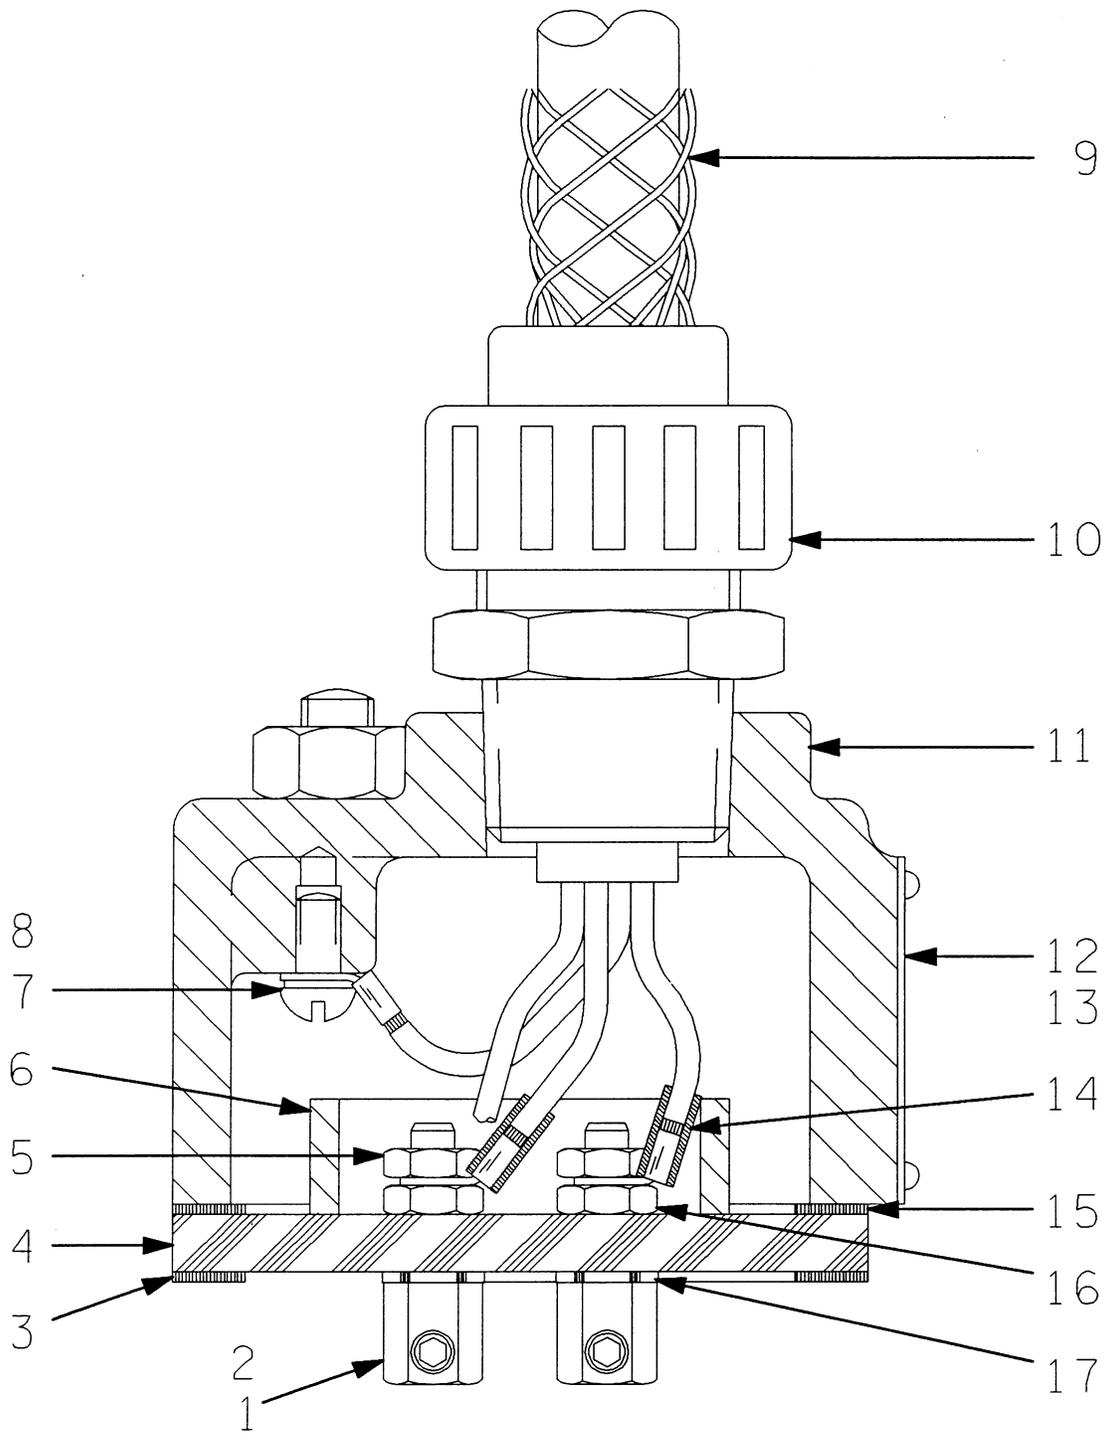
47367-051 Terminal Housing And Cable Assembly
